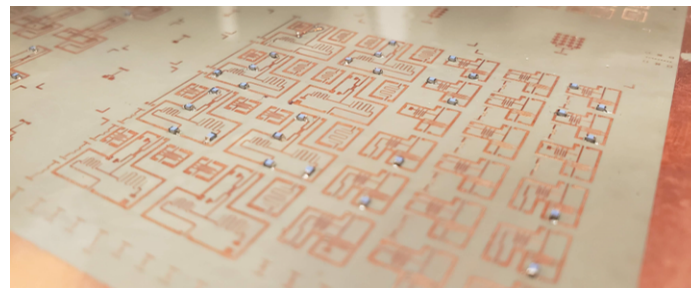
0402 (1005 metric) footprint resistors soldered onto coupons of integrated passive components.
